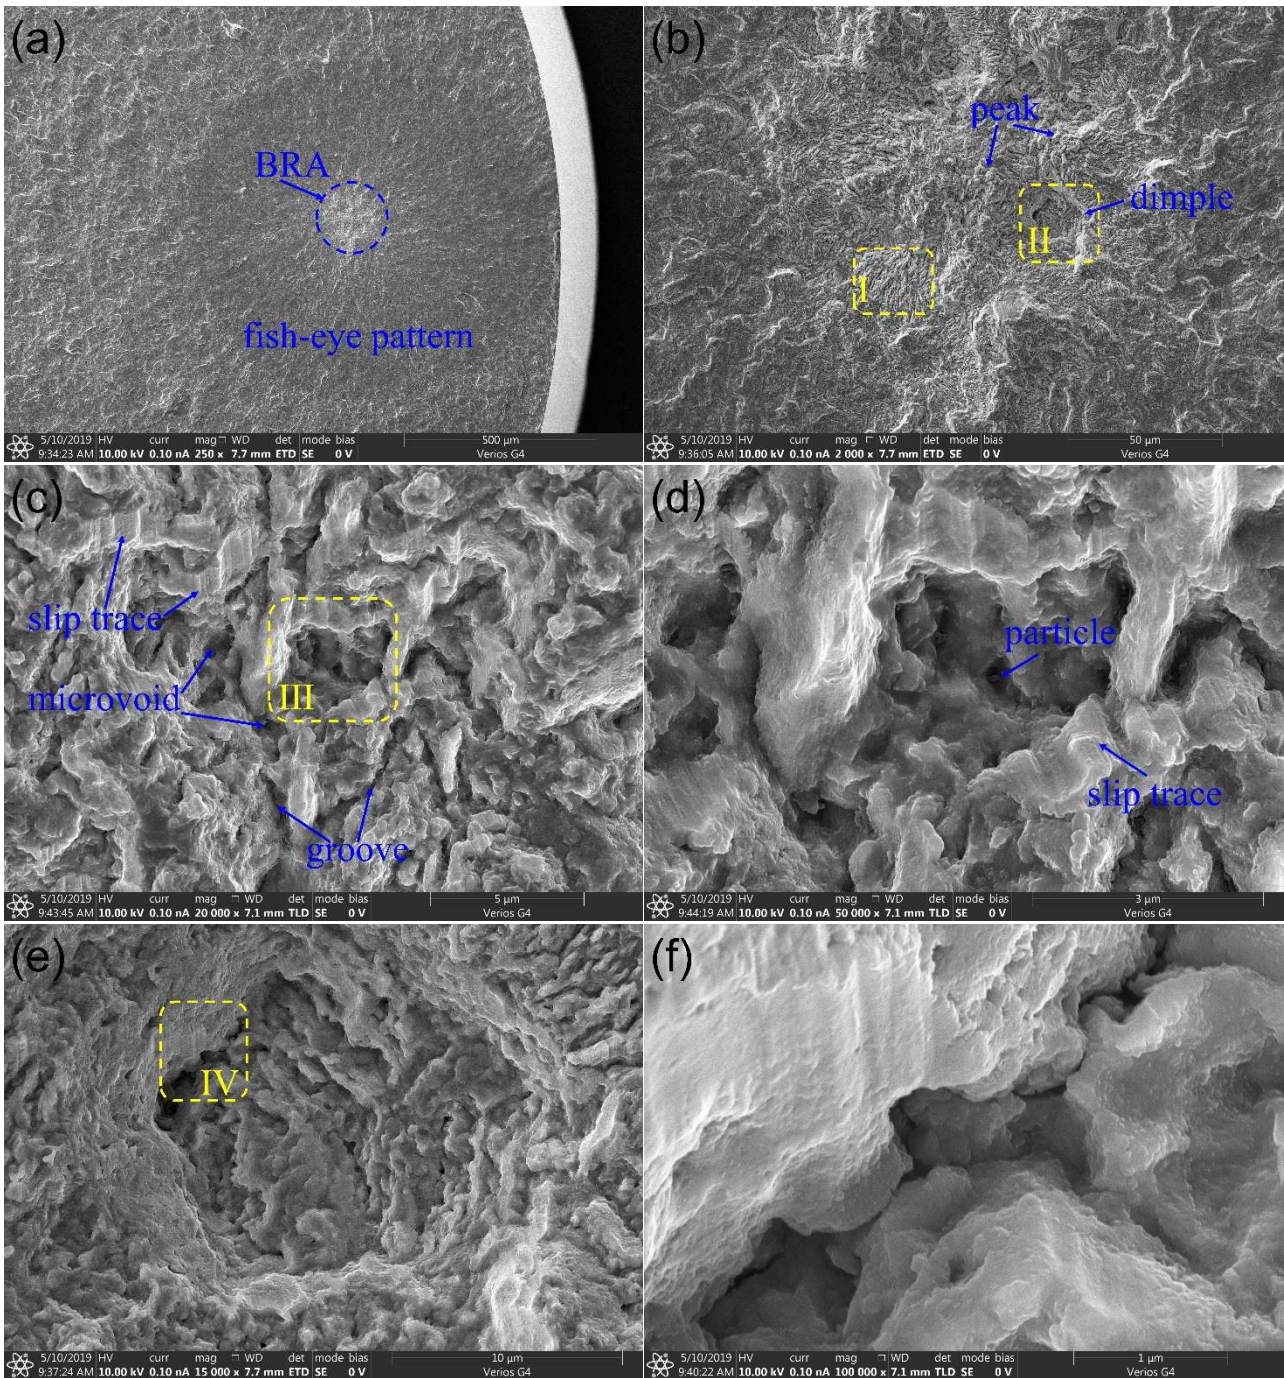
Example of an interior-induced fracture surface ($\sigma_a = 580$ MPa, $N_f = 1.25 \times 10^8$): (a) overall view of fish-eye pattern; (b) magnified image of the bright rough area (BRA) at the center of the fish-eye pattern; (c) magnified view of Area I in (b); (d) magnified view of microvoids in Area III in (c); (e) magnified view of a dimple in Area II in (b); (f) magnified view of grooves at the dimple bottom IV in (e).
